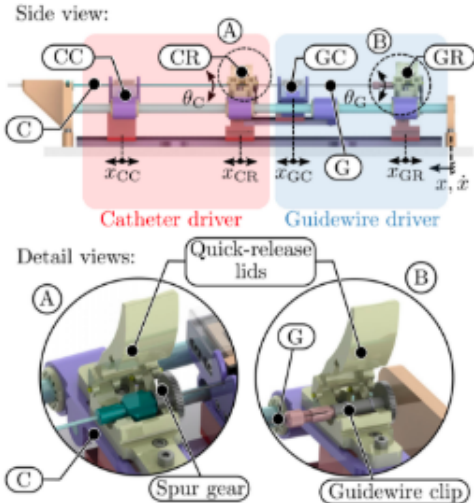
Remote manipulator components[14], C - Catheter, G - Guidewire, A - Actuation unit, CR - Catheter Rotation, GR - Guidewire Rotation, CC - Catheter Carrier, GC - Guidewire Carrier
